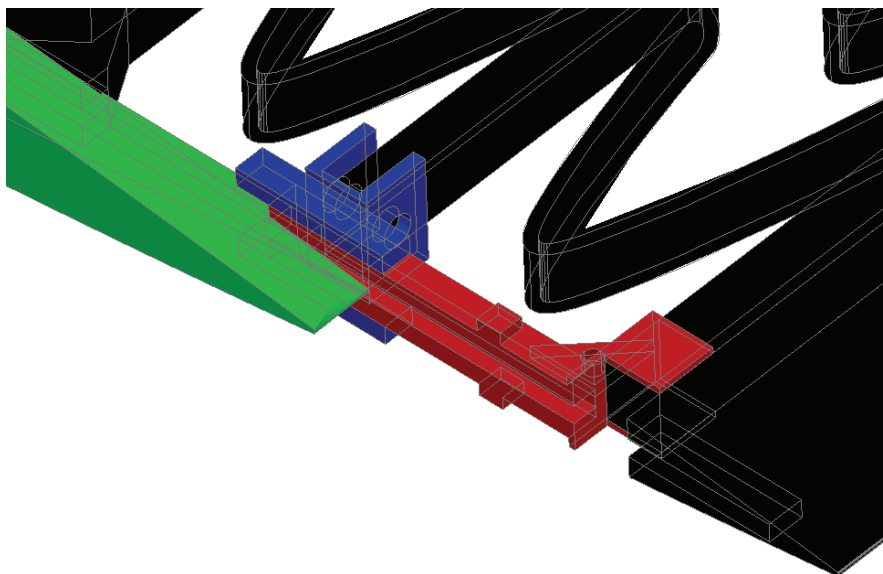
CAD model of assembled prototype: detail of the sliding supports.
